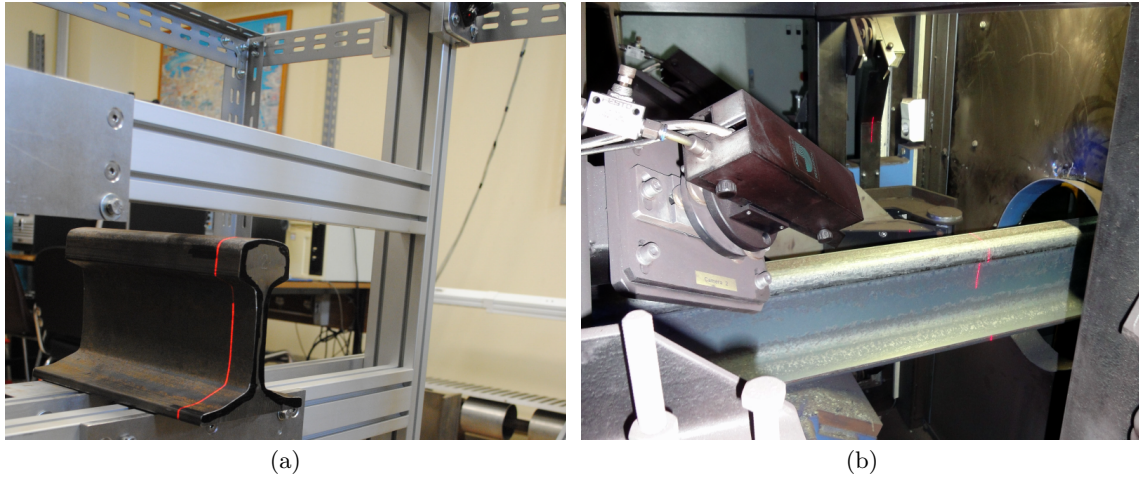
Images of the rail inspection system. (a) Laboratory prototype. (b) Industrial prototype.
